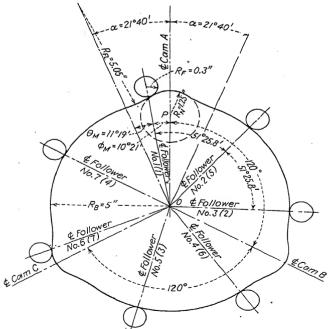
Cam-ring layout for the radial engine in the Example of Par. 10-10.
